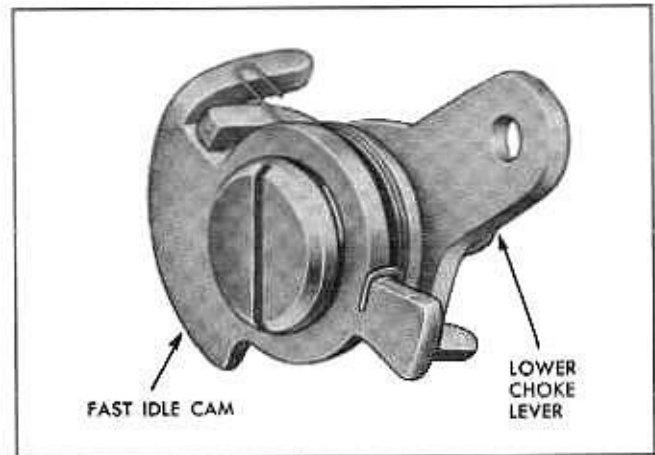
B-23 Fast Idle Cam and Lower Choke Lever
